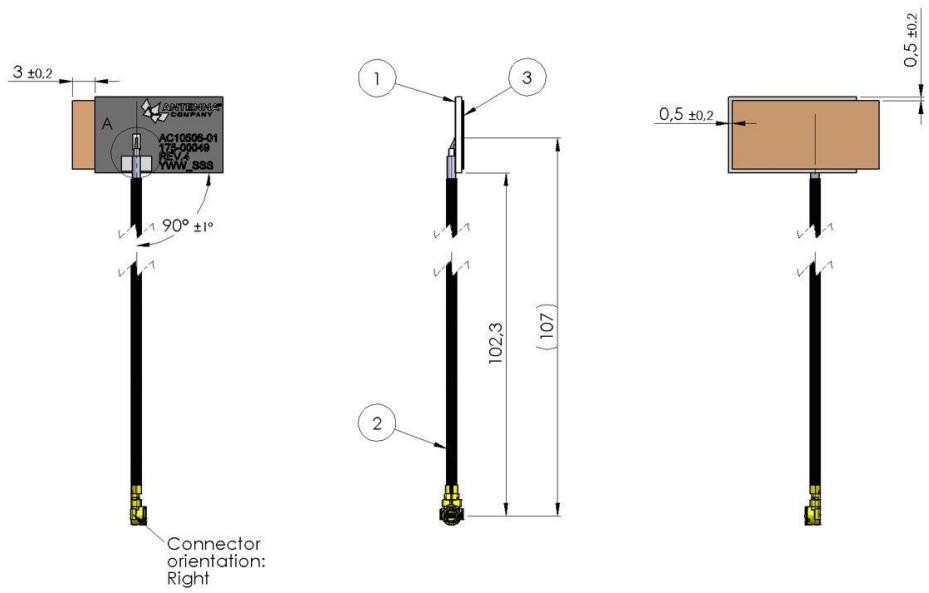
AC10506-01A top/bottom view and dimensions (mm)
